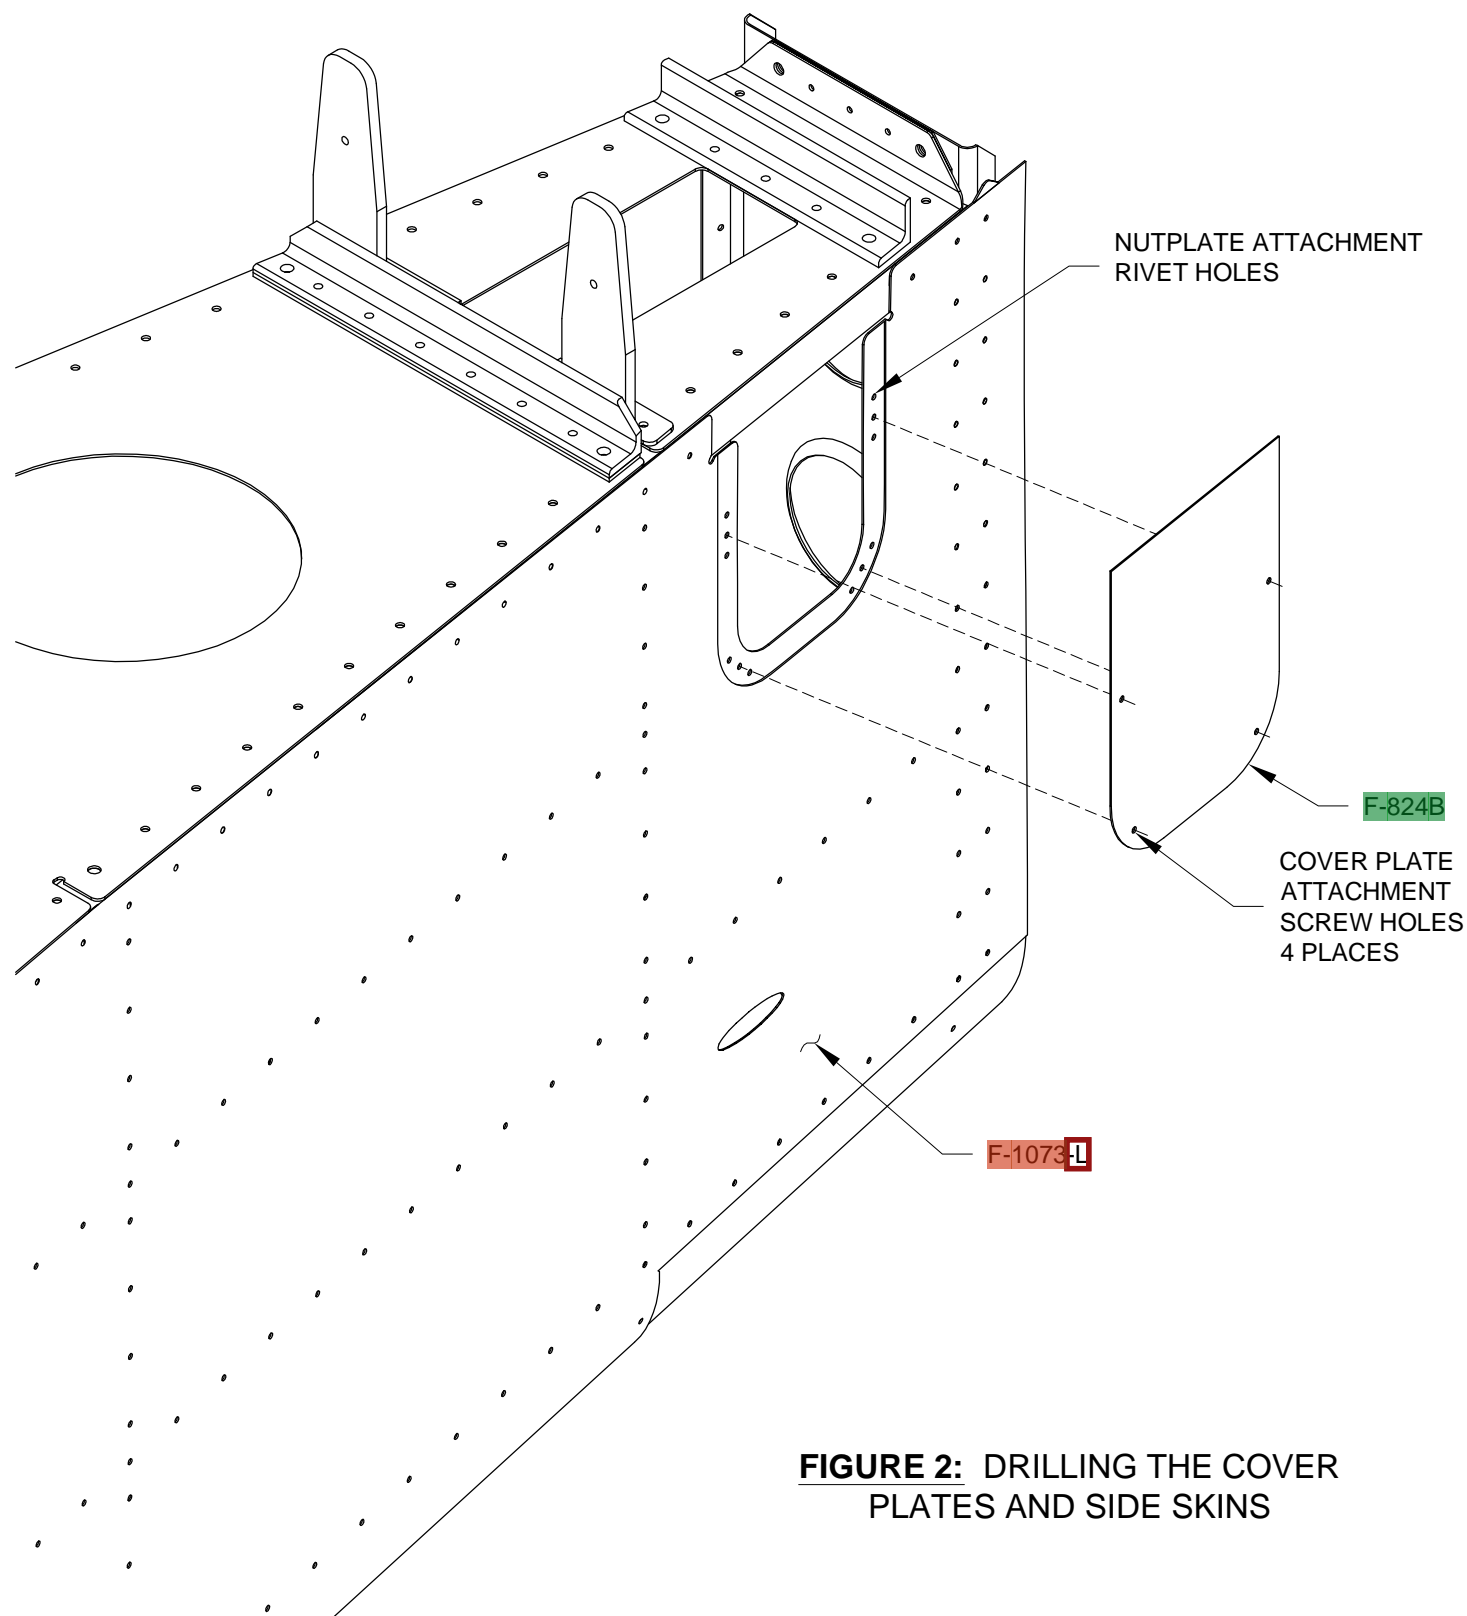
DRILLING THE COVER PLATES AND SIDE SKINS
